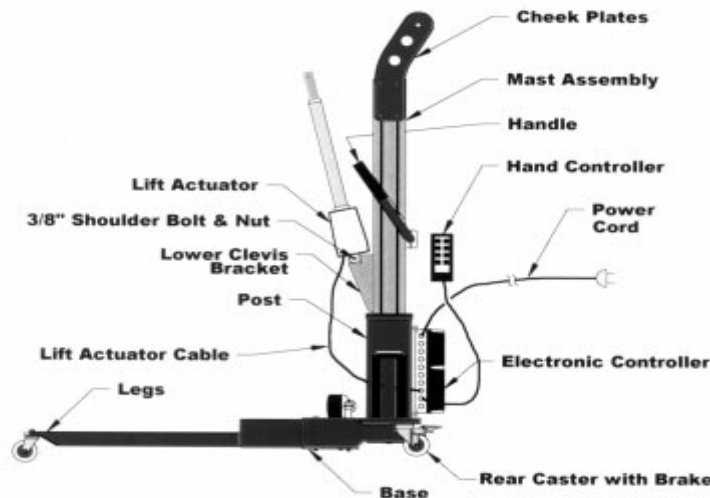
(Base, Mast and Lift Actuator Assembly)
